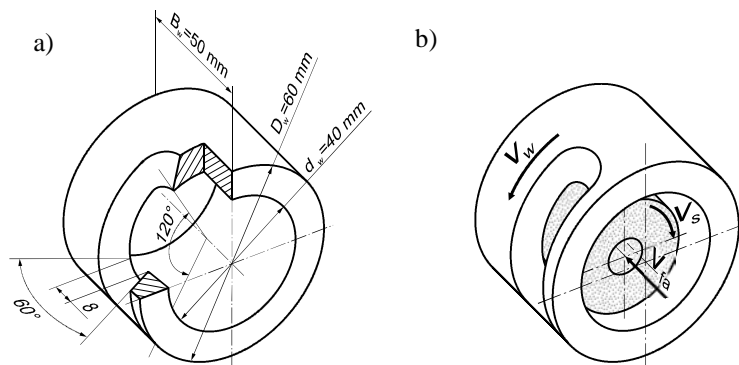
Sleeve for thermovision temperature measurement in single-pass internal cylindrical grinding: a) dimensions of sleeve, b) kinematics of grinding
